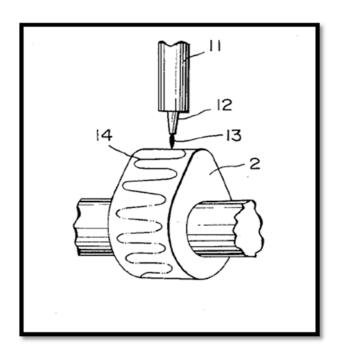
A schematic perspective view showing a manner of a remelting treatment to produce the camshaft.
